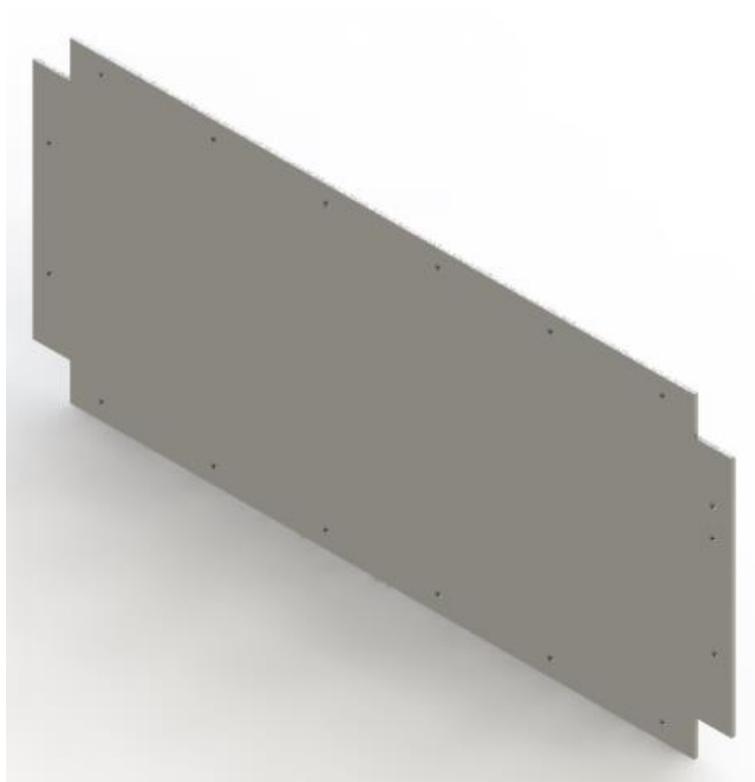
Isometric view of a flat pattern of one of the sheet metal parts
